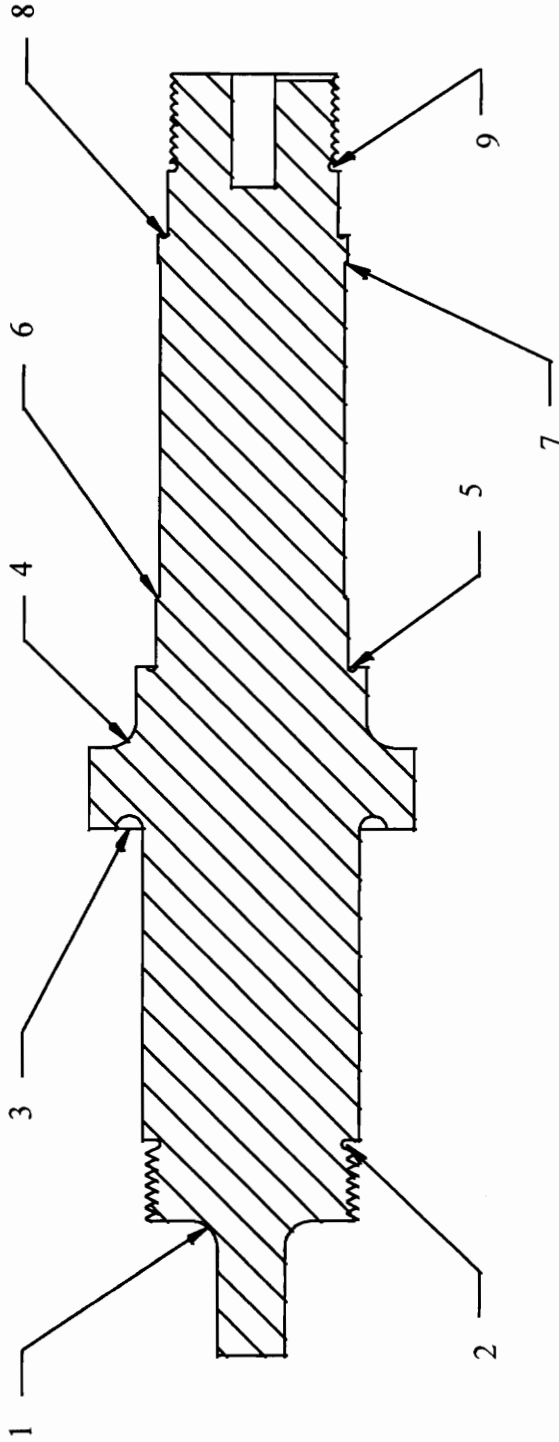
Shaft Cross Section Showing Fillet Locations
